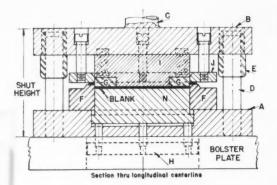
The blanking die shown in this drawing provides for reinserting the cut blank in work strip on the upstroke.
